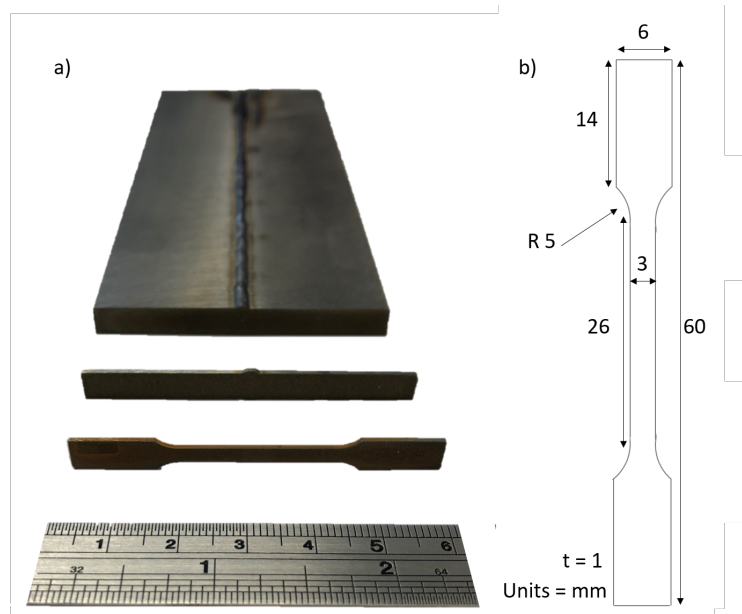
Microtensile specimens taken from the cross section of the weld as shown in part a) and machined by EDM into the geometry shown in part b) with thickness ( $t$ ) of 1 mm, a chamfer radius ( $R$ ) of 5 mm for a gauge length of 26 mm and gauge width 3 mm.
